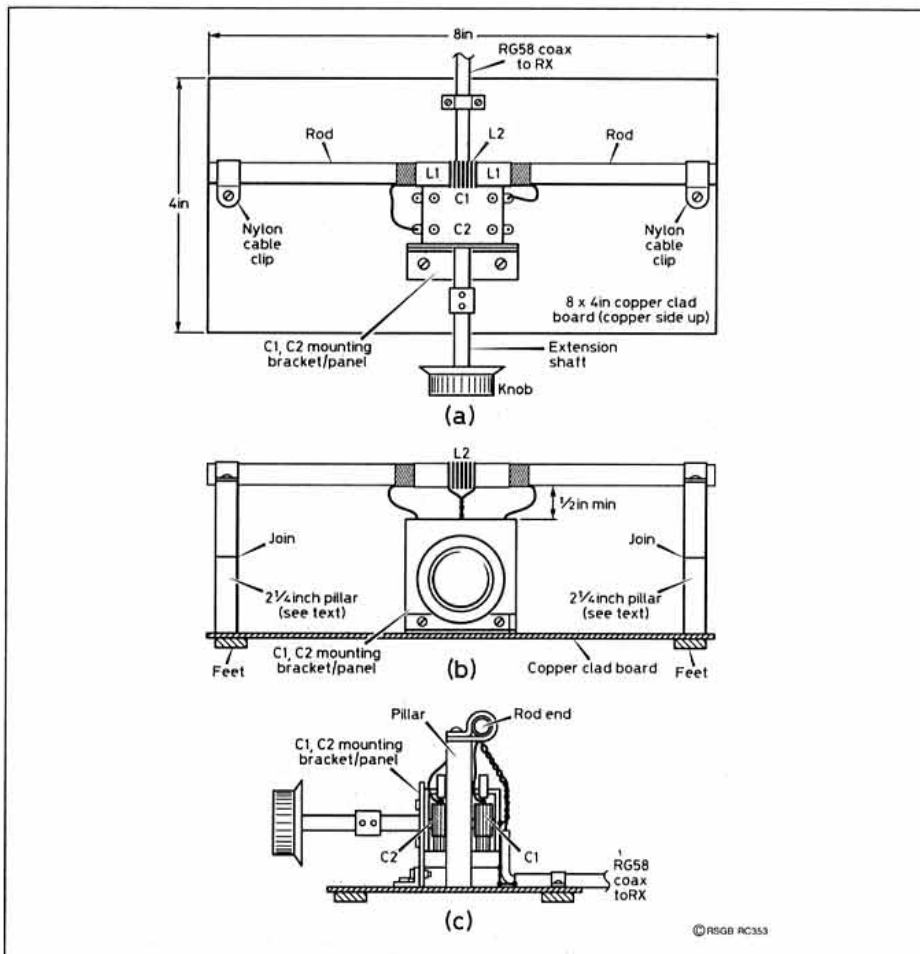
Construction and layout of complete antenna: (a) Plan view (b) Front view (c) Side view.
